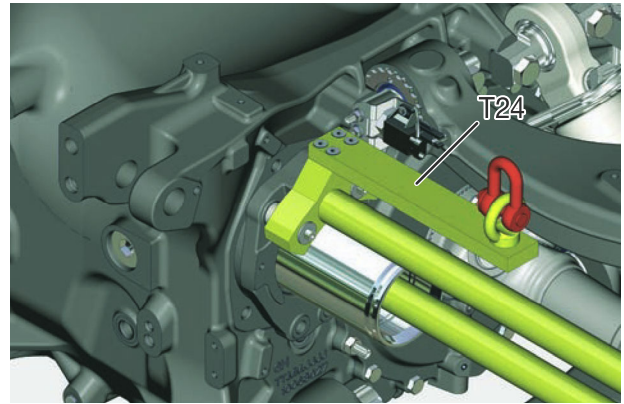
Fit special tool T24 (see drawing T24 p. 232) on the guide sleeve (9), attach to a hoist, apply tension with the hoist and use 2 levers to shift the guide sleeve (9) from its seat.
